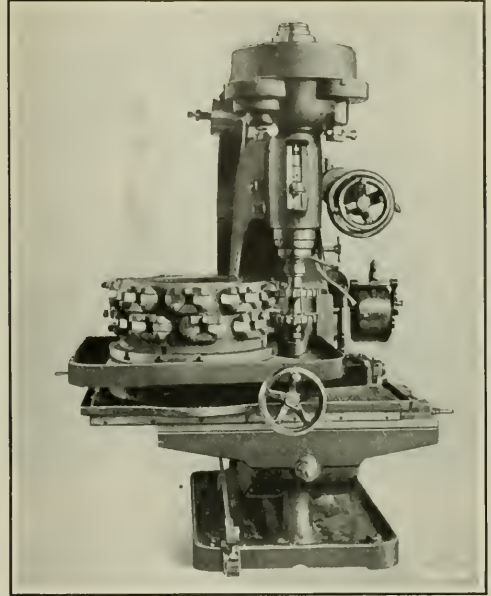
Straddle-milling Yokes, using a Continuous Rotary Milling Fixture
